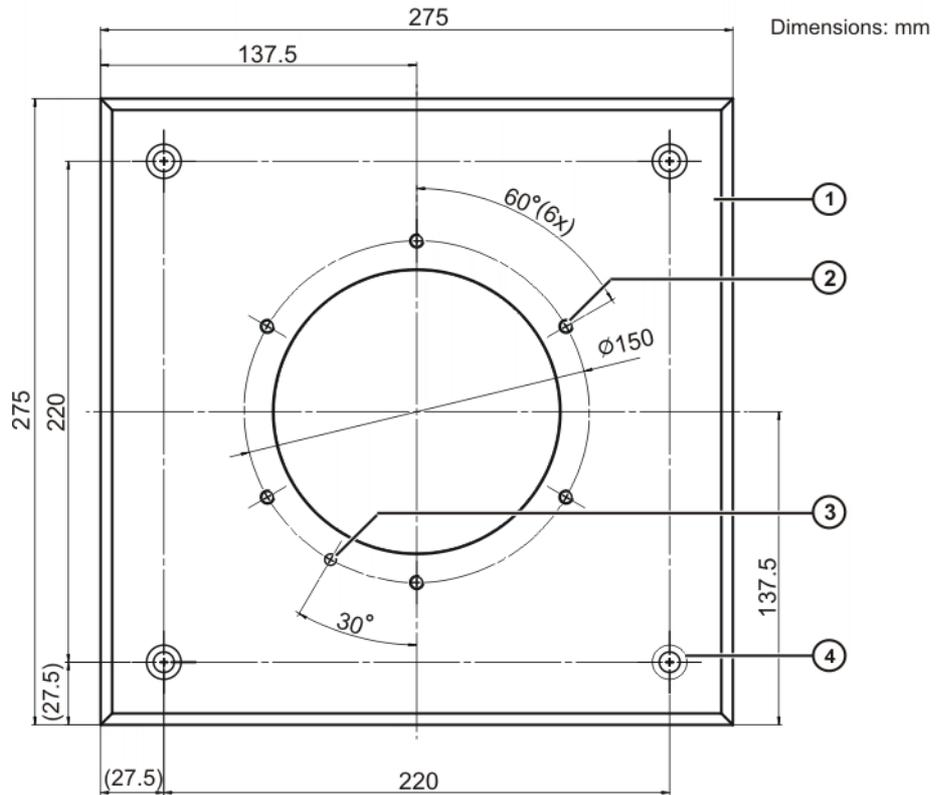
Hole pattern for fastening the robot with the KUKA adapter plate
